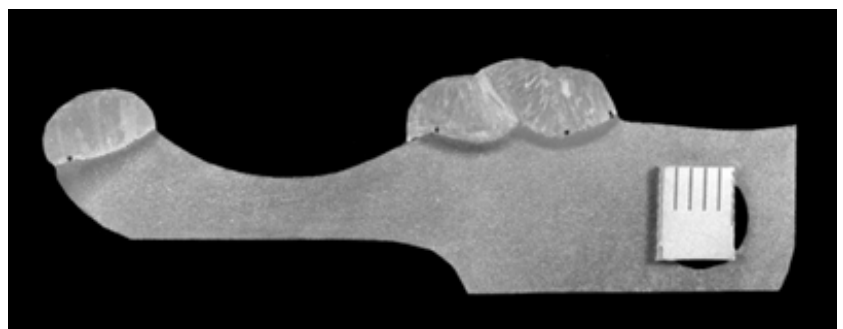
Macrostructure of the overlay welds made using the MAG method (process 136, weld deposit classification ISO 1071 – T C NiFe-2 M) on an element made of grey cast iron – visible gas pores (2011 according to PN-EN ISO 6520-1) near the fusion line
